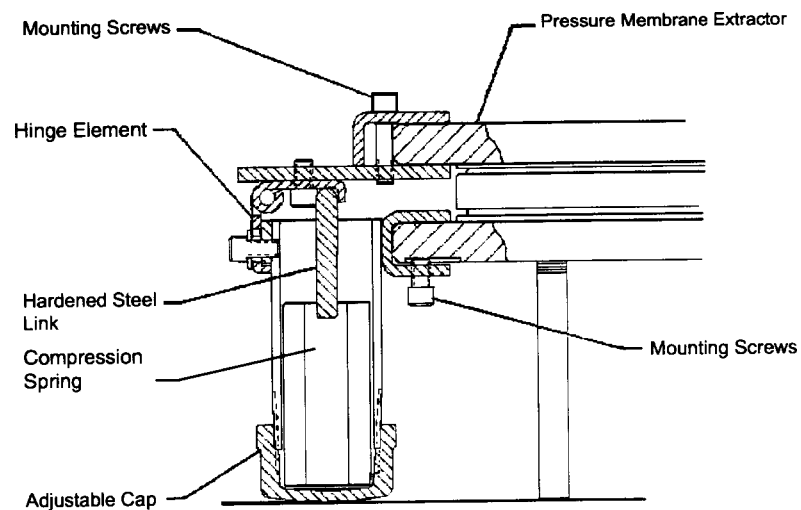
Cross section view of PM Hinge mounted on Pressure Membrane Extractor
